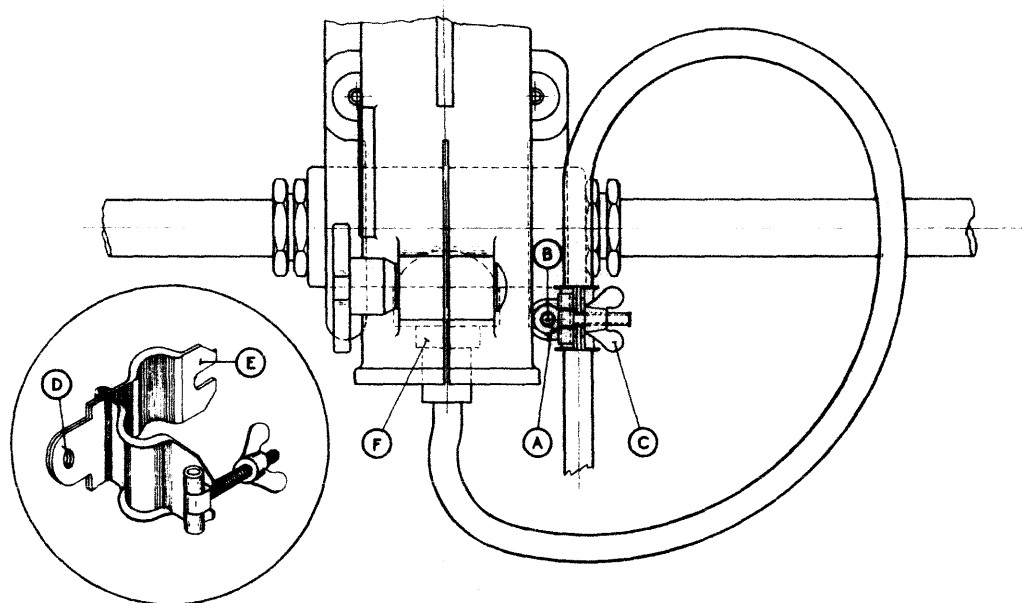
FITTING CABLE CLAMP TO DIPOLE ASSEMBLY.
